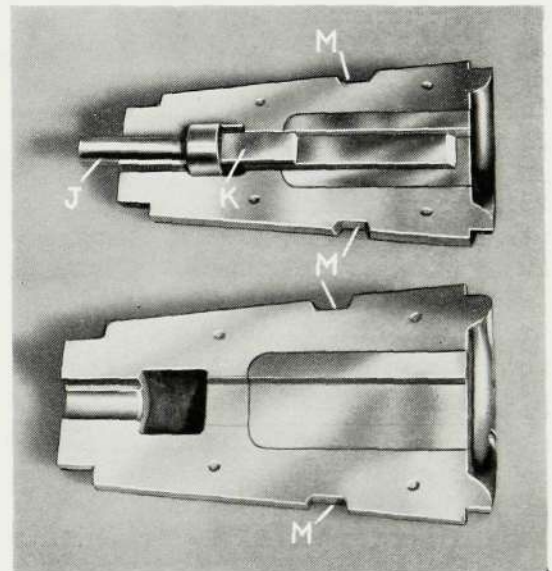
A view of the tapered jaws for the cold heading set-up seen in Fig. 3, showing details of the inserts, and the arrangements for location and ejection of the workpiece
